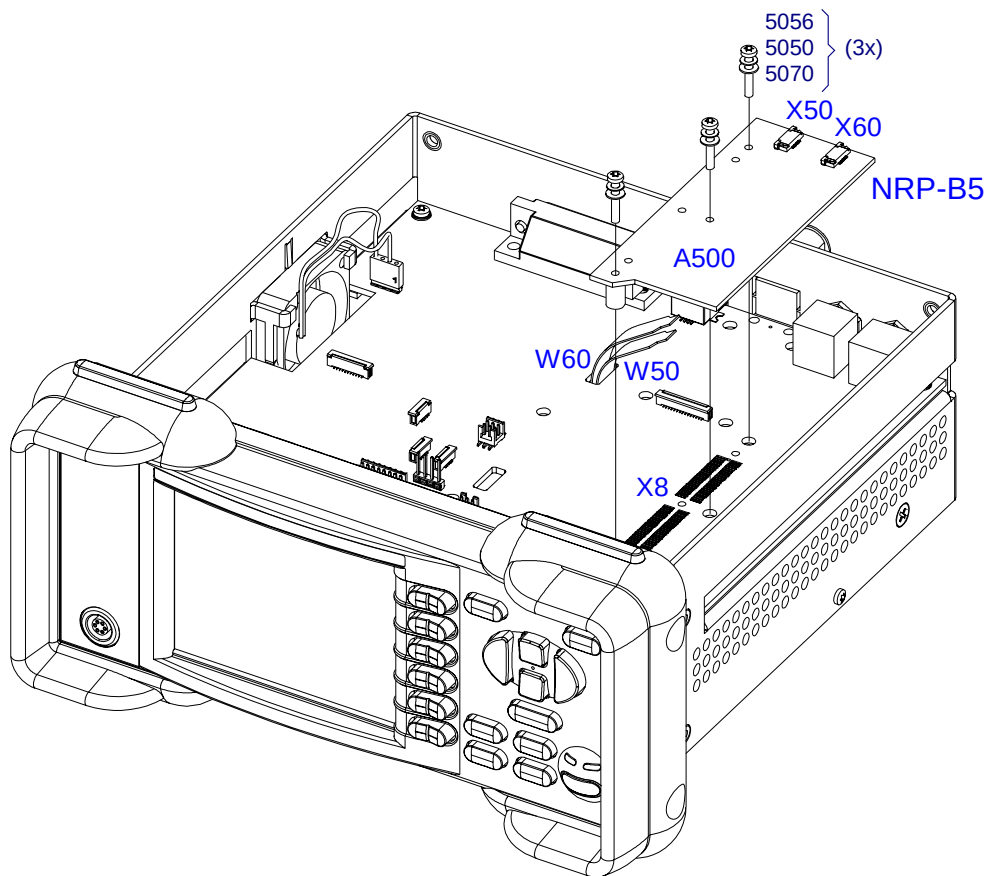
Removing and installing the 3rd and 4th test input (board A500)
